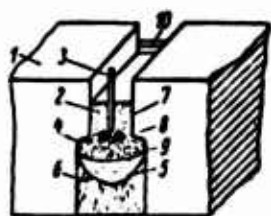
The schematic diagram of the process for electroslag welding: 1 - welded part; 2 - slag bath; 3 - electrode; 4 - melted basic metal; 5 - metallic bath; 6 - welded seam; 7 - edges of welded part; 8 - drops of electrode metal; 9 - hot-test zone of welding bath; 10 - copper slider.
